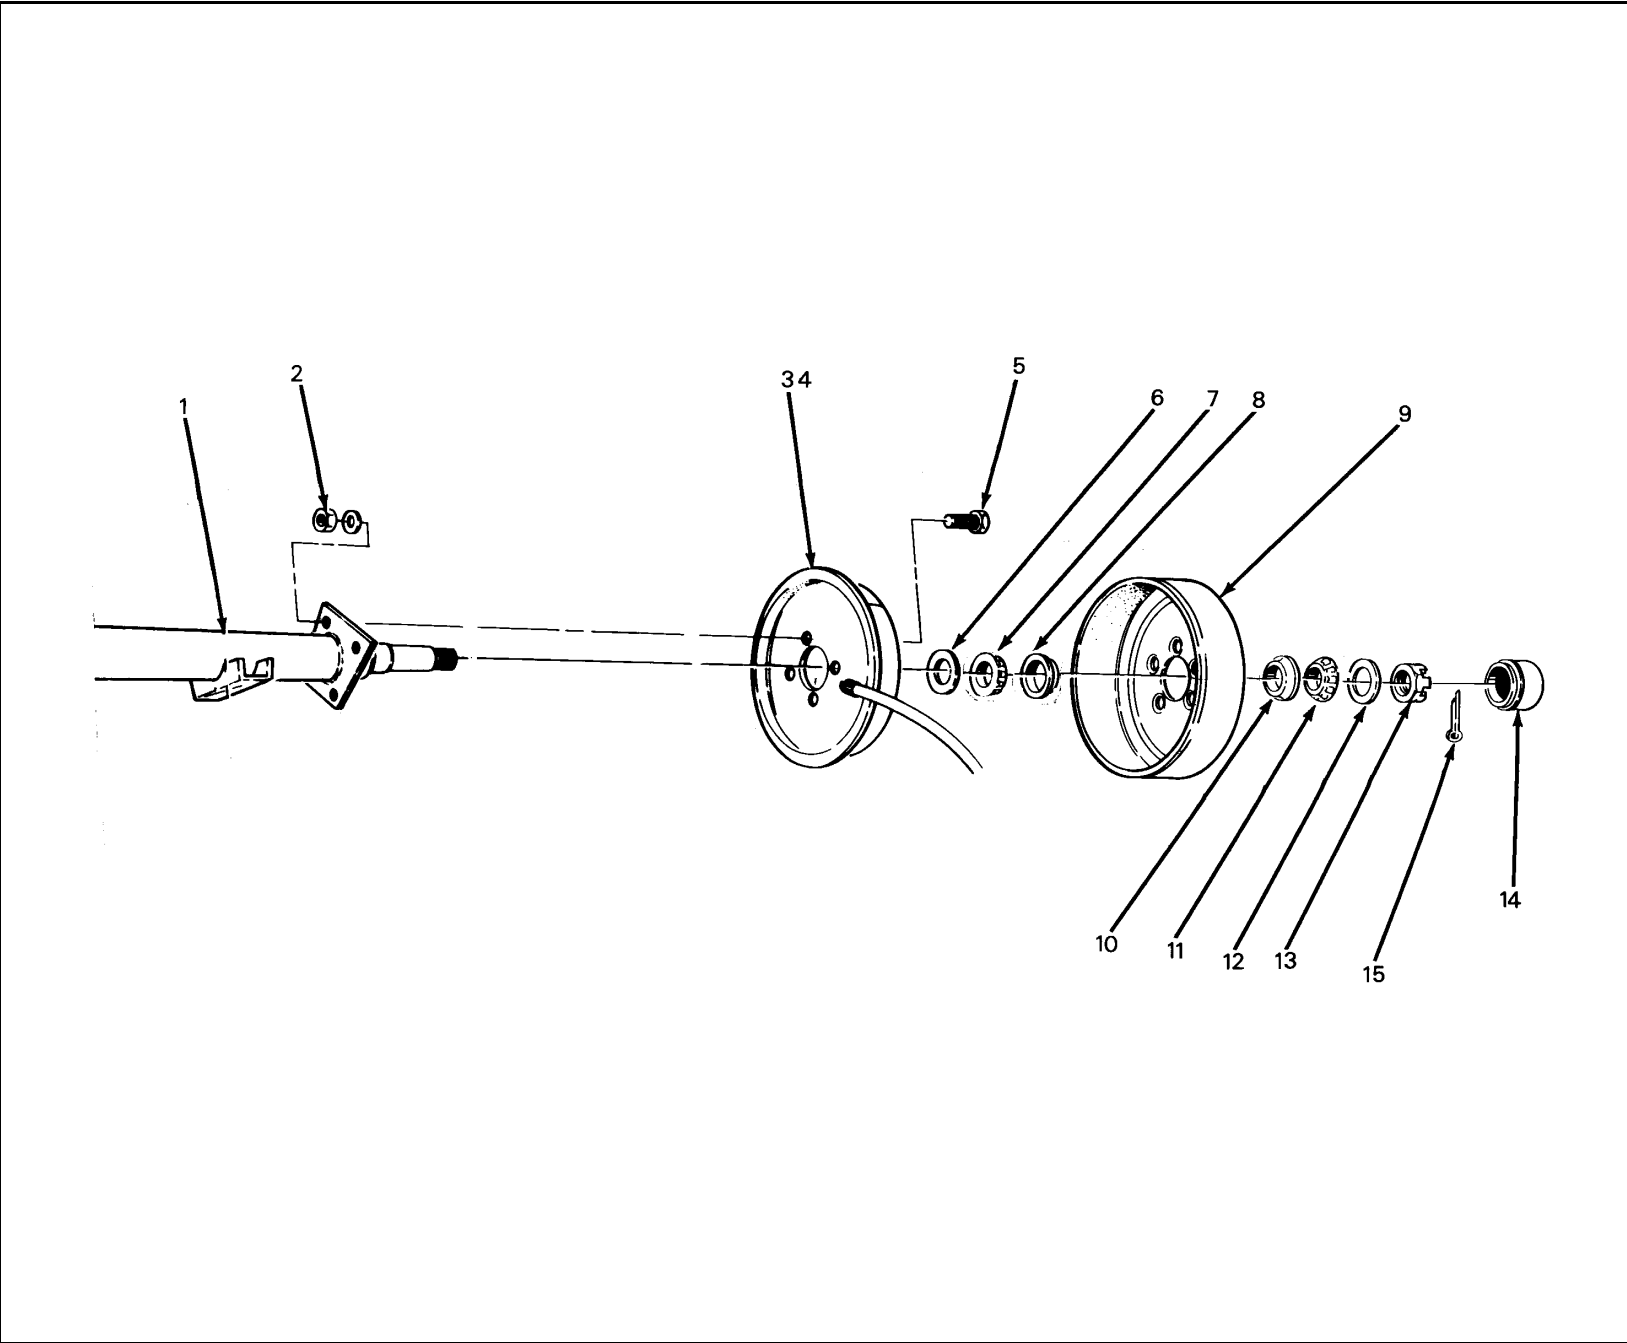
(Sheet 1 of 2) Axle and Brake Assembly
